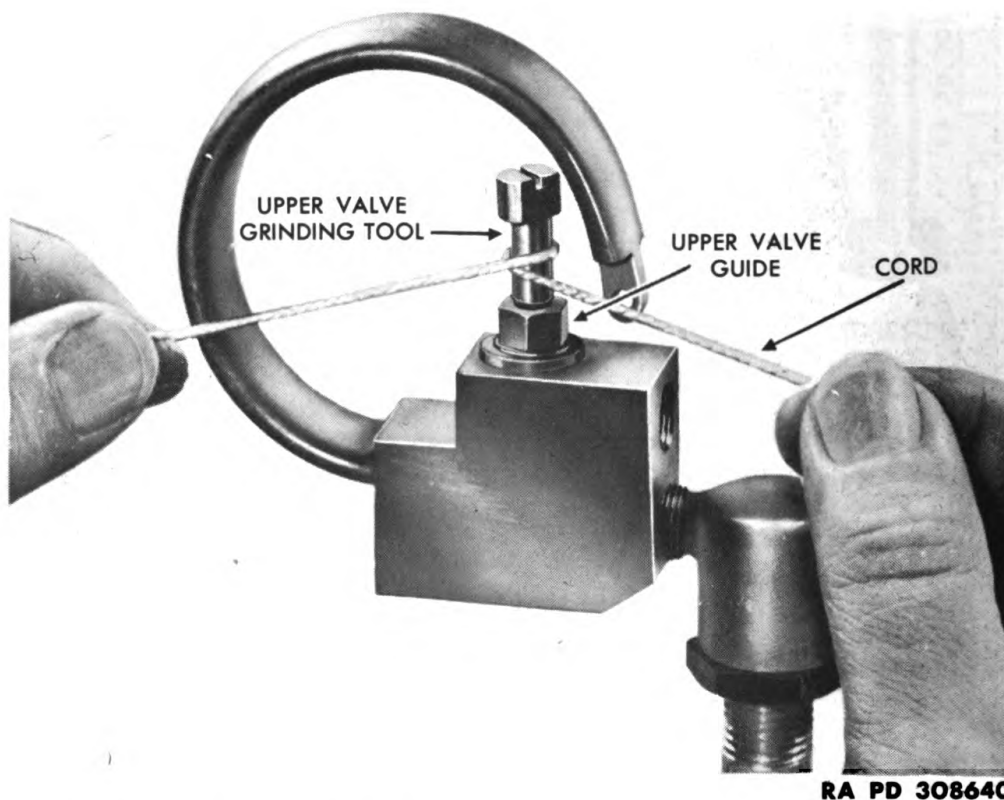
Grinding Upper Valve, using tool 41-T-3381-20
